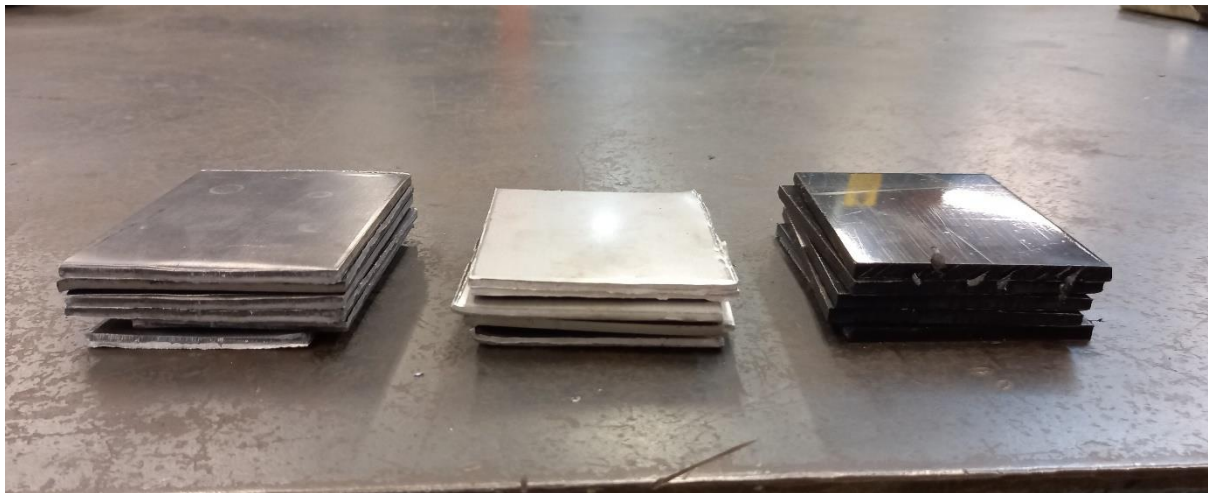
Samples after being cut to the desired sizes, mild steel, stainless steel, and HDPE (left to right).
